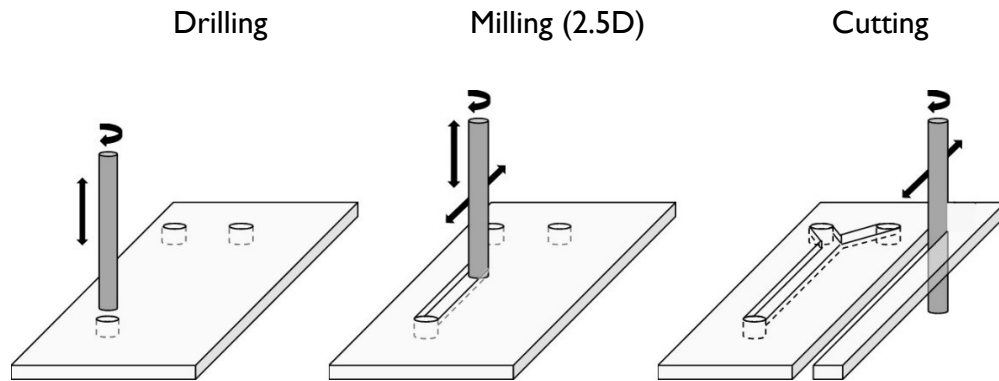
Versatile glass machining by SACE technology: drilling, milling and cutting by the same technology on the same setup.
